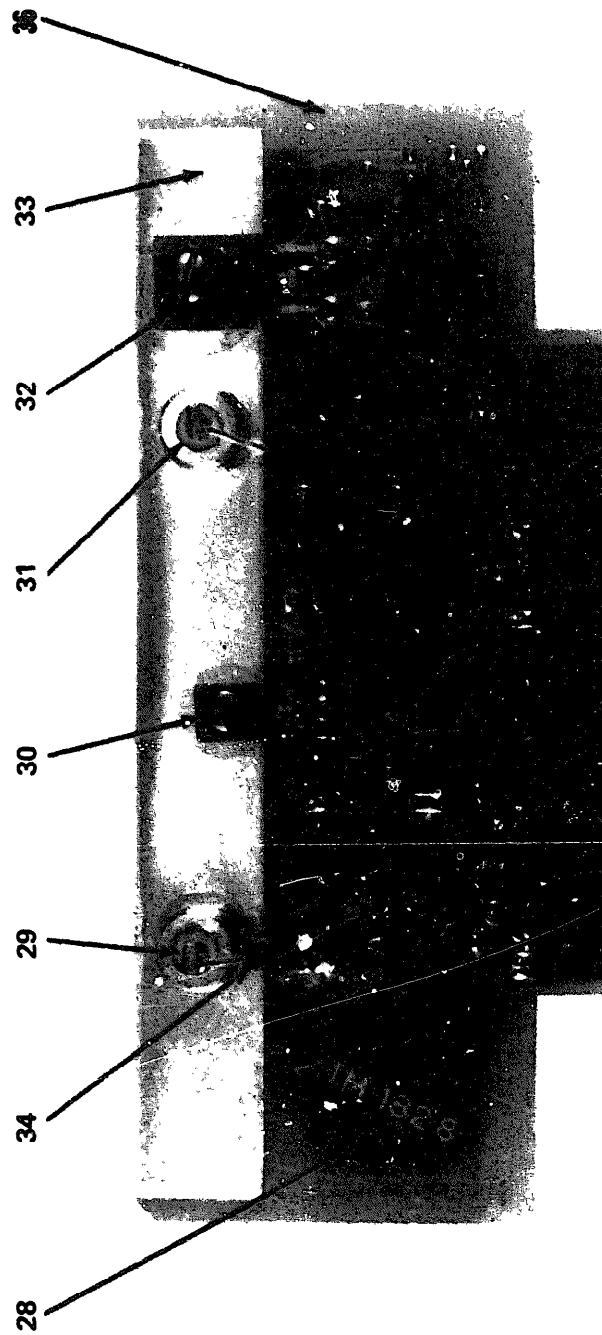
+20 & +5V Regulator Assembly (Sheet 2 of 2)
